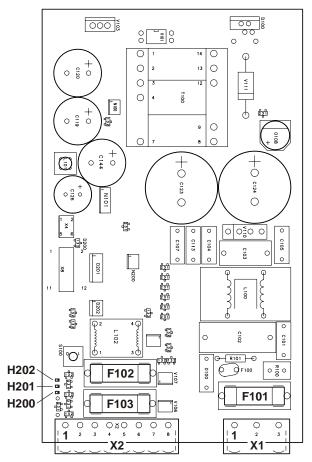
Printed circuit board view of power supply (70 W) FP2001
